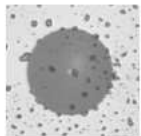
Visual inspection of optical connector after cleaning, showing residue from poor wiping techniques
